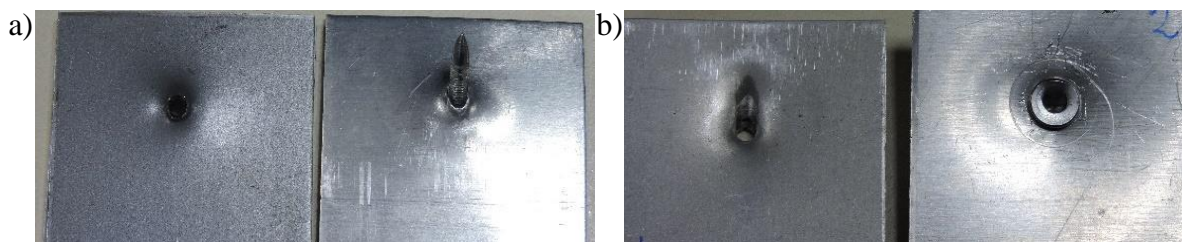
Top (a) and bottom (b) view of material failure with loss of interlock and element failure (nail broken around the top).
